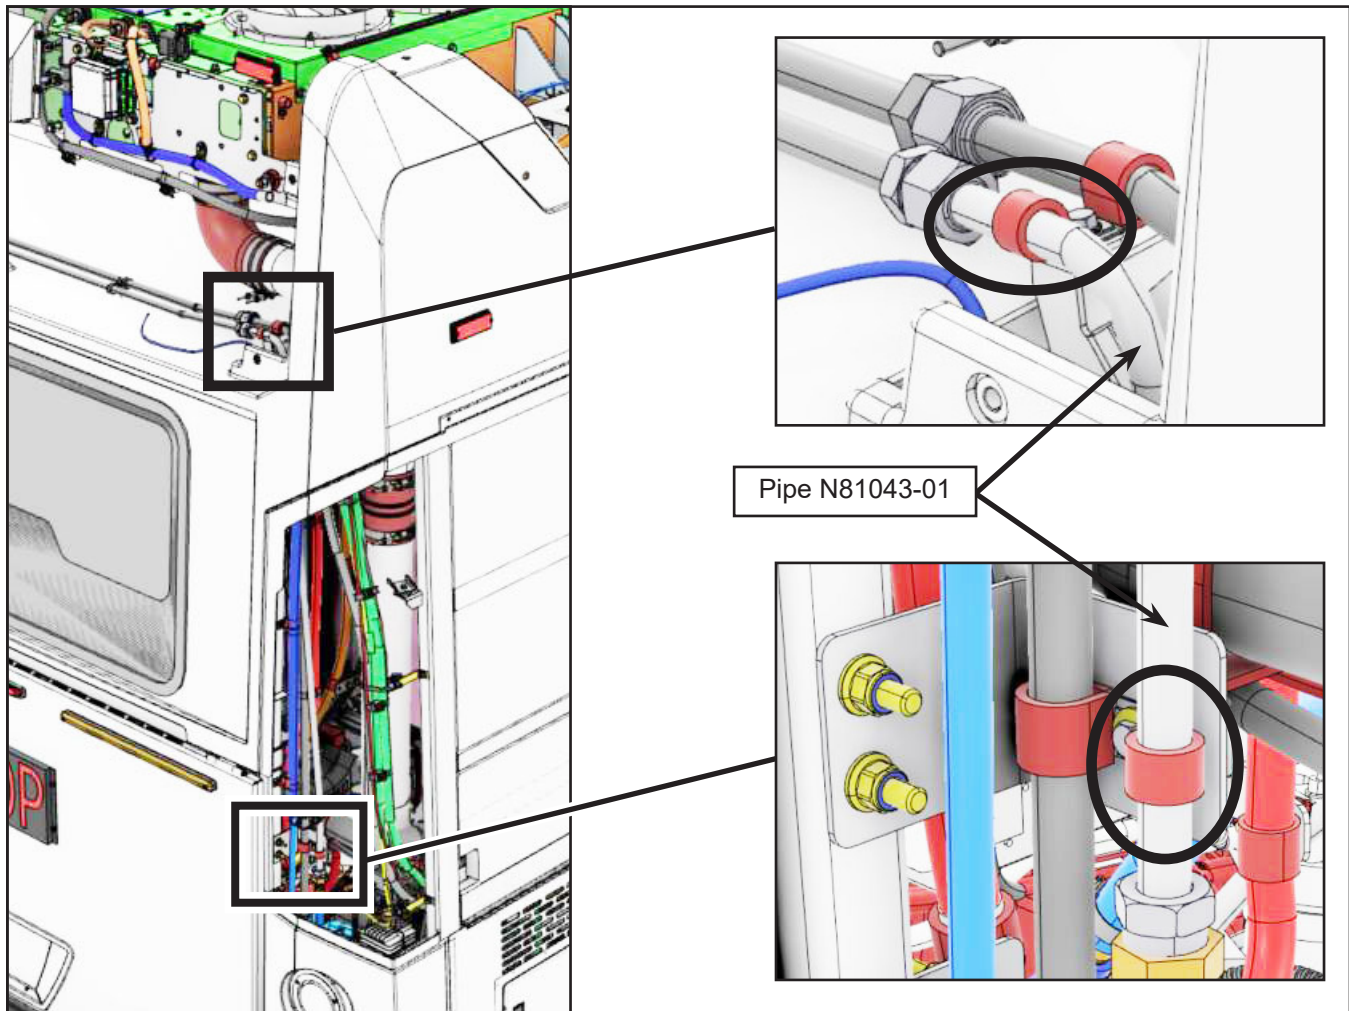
Remove P-clamps to Free Pipe N81043-01
